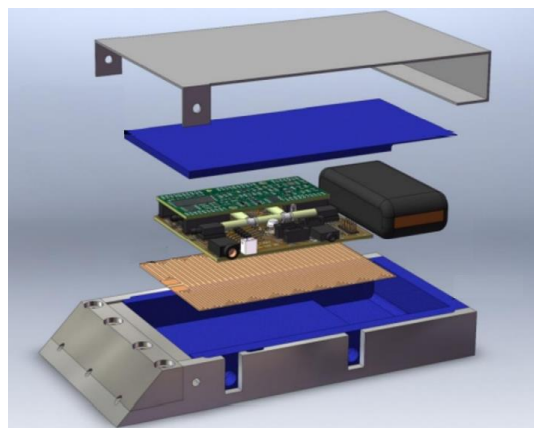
Exploded View of BLDS Electronics Unit³.
